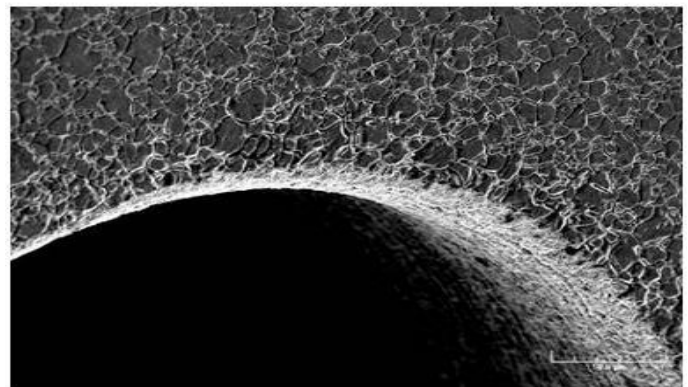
(c) Hole drilled on 500 μm thick SS-316L sheet at 1 KHz and 16 Vpp
